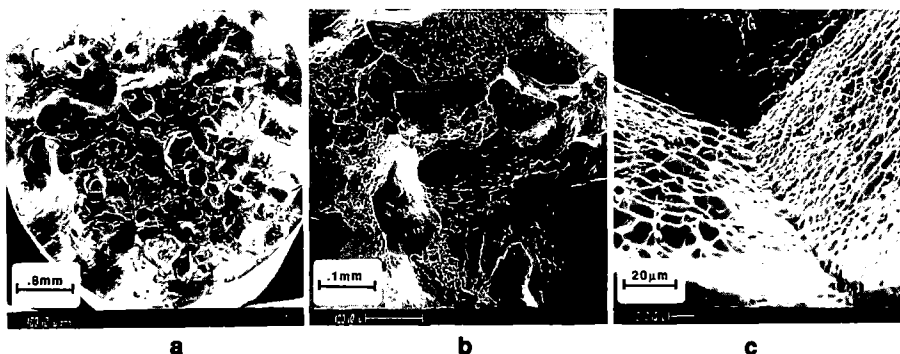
Tensile fracture surfaces of: (a) Condition 1, (b) Condition 2 specimens, and (c) high magnification of Condition 1 highlighting ductile dimpling along GBα fracture surface.
